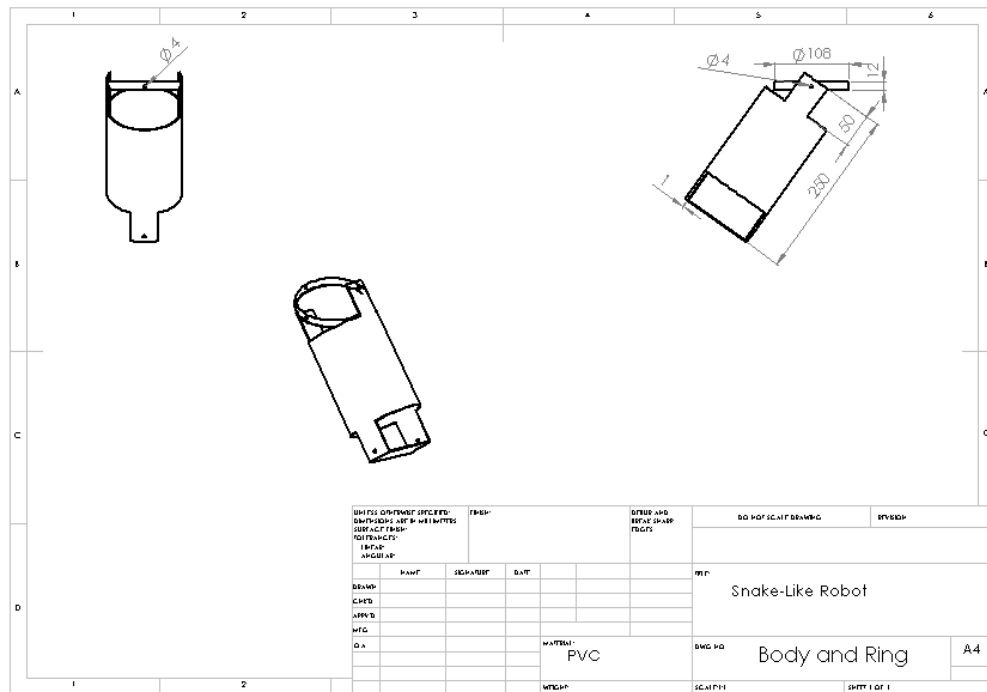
Dimension of Body and Ring Part in Drawing Mode
